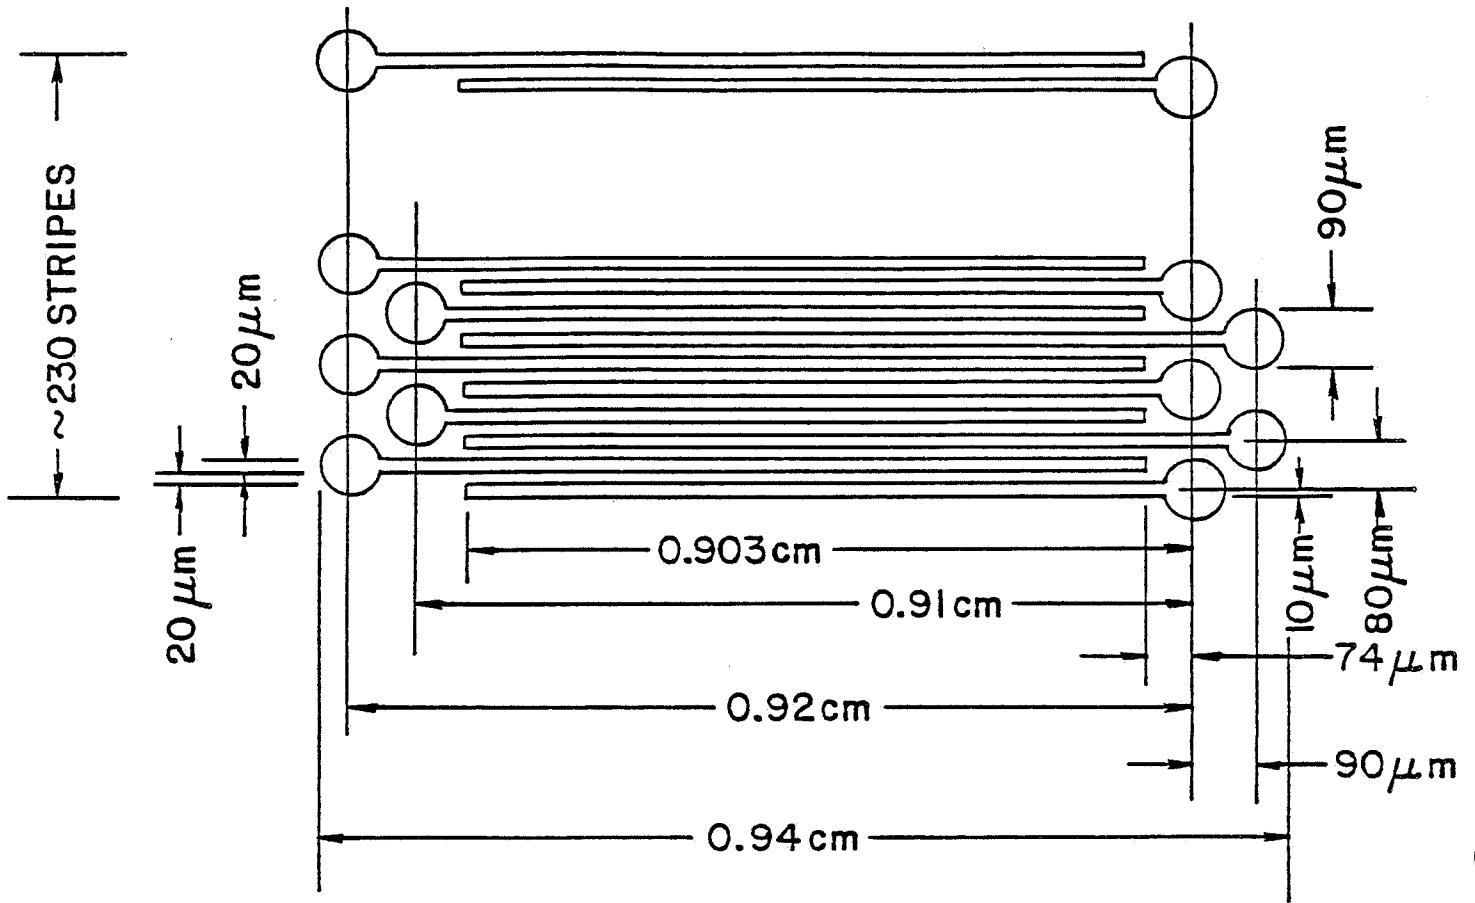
Layout of stripes and PC mounting board for 40 micron prototype.
